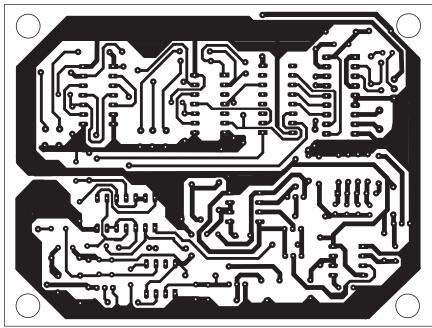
Actual-size, single-side PCB for Fig. 2 (PCB-2)
